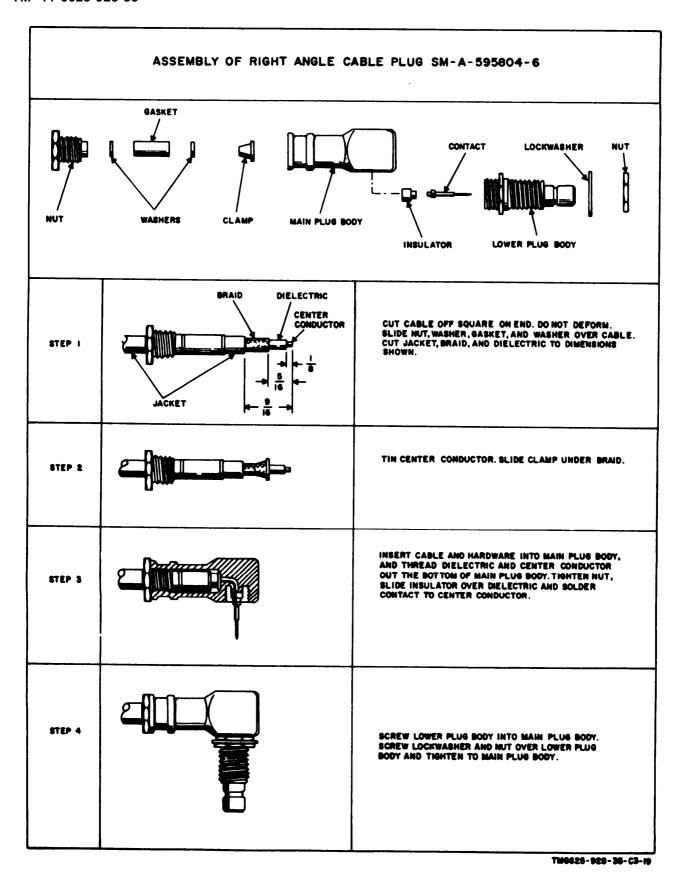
Assembly instructions for RF cable connector SM-A-595804-6.
